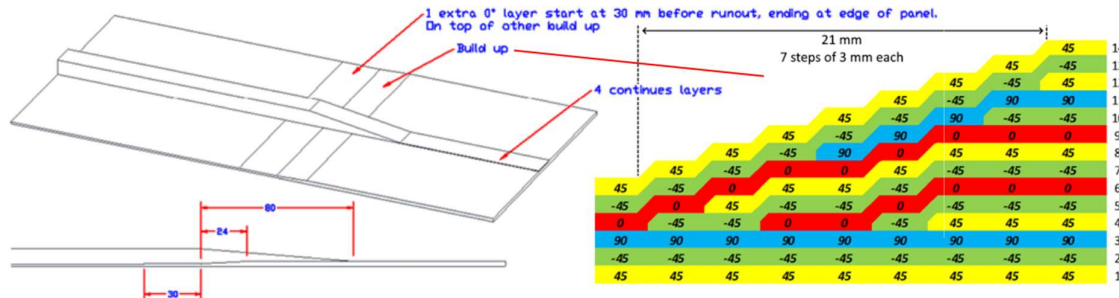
The composite lay-up of the shear panel. The complete panel is made using a fibre placement machine.
